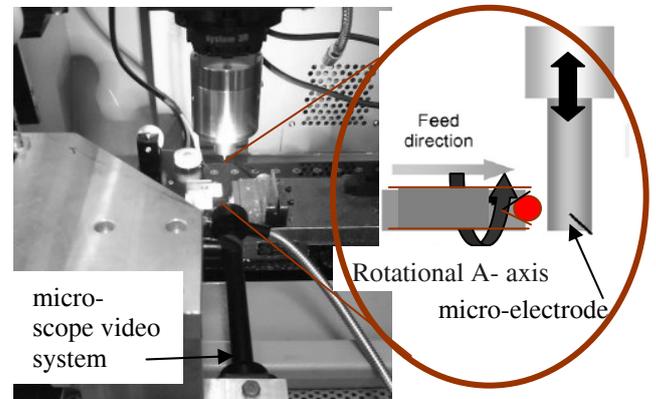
Assembled multi-axial WEDG on the micro-EDM machine with microscope video system.
